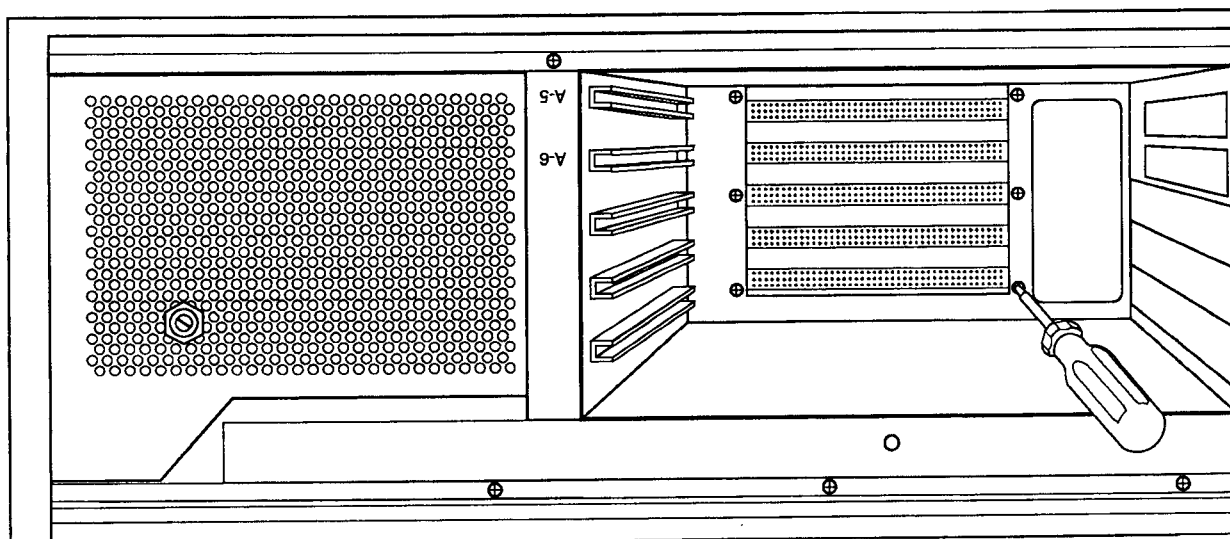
Removing the retaining screws for the main interconnect board assembly from inside the left cardcage.
